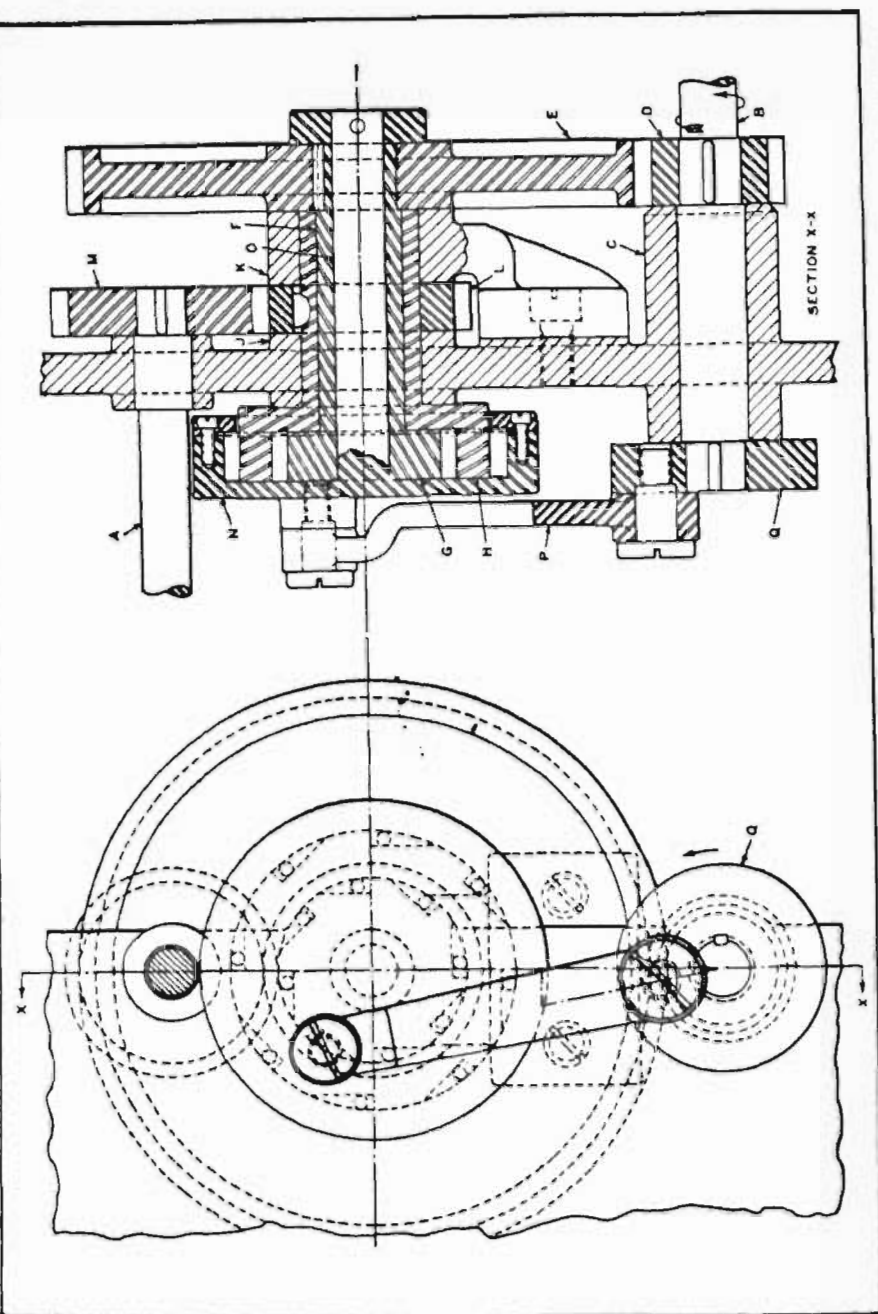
Mechanism by which the shaft B, rotating at constant speed in one direction, imparts a variable rotary movement to shaft A
